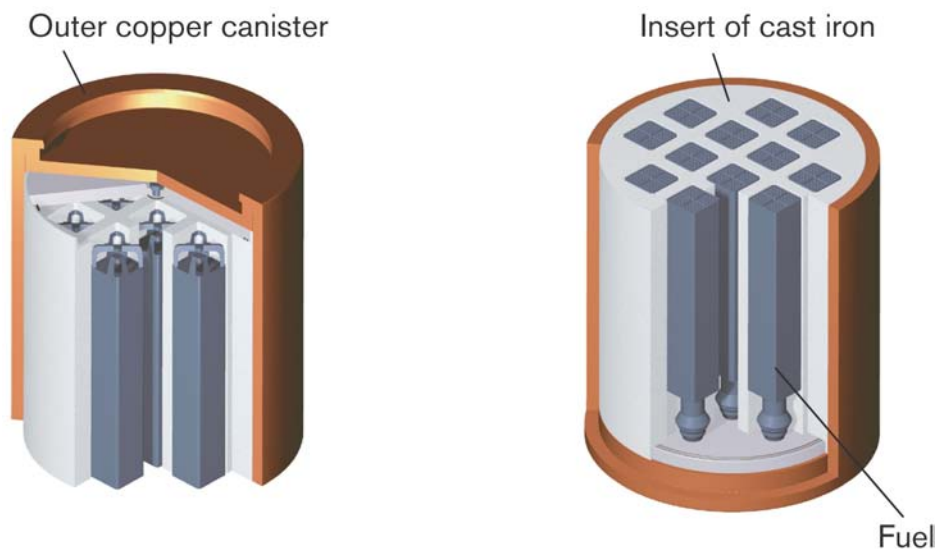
Expanded view of spent BWR fuel disposal canister.
